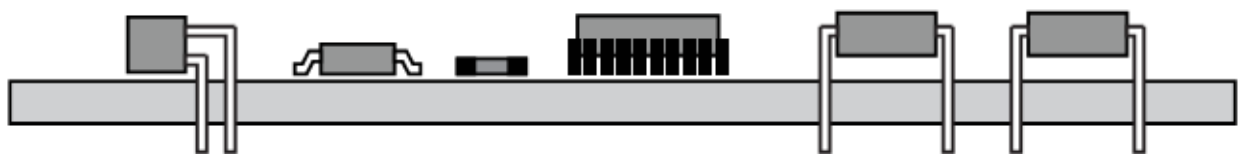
Method of installation and assembly of components and printed circuit board of the electrocardiograph
